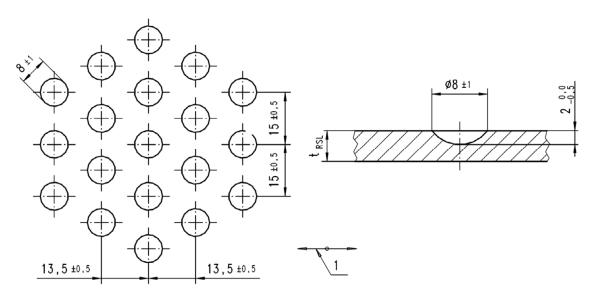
Examples of recessed ROBO®SLIDE L2 sheets for guides
